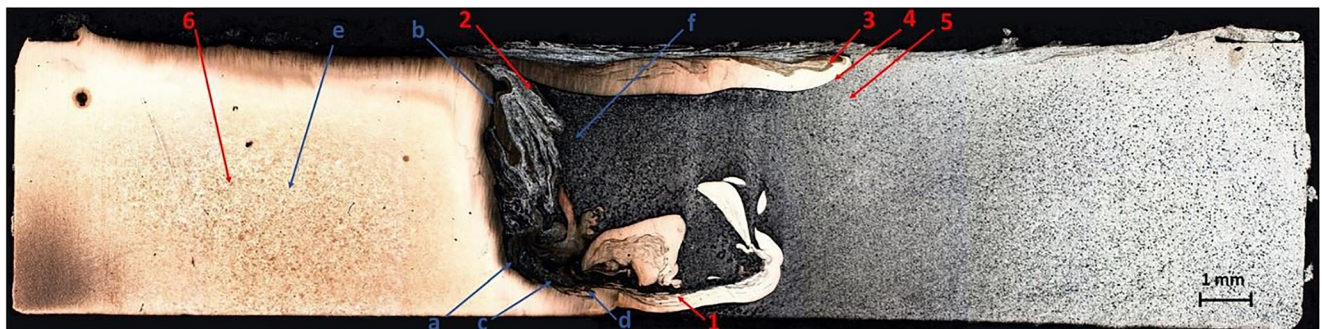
Optical macrograph of the bimetallic FSW Al (right side and retreating side of the weld)–Cu (left side and advancing side of the weld) joint, with the areas marked from “1” to “6” detailed in the
